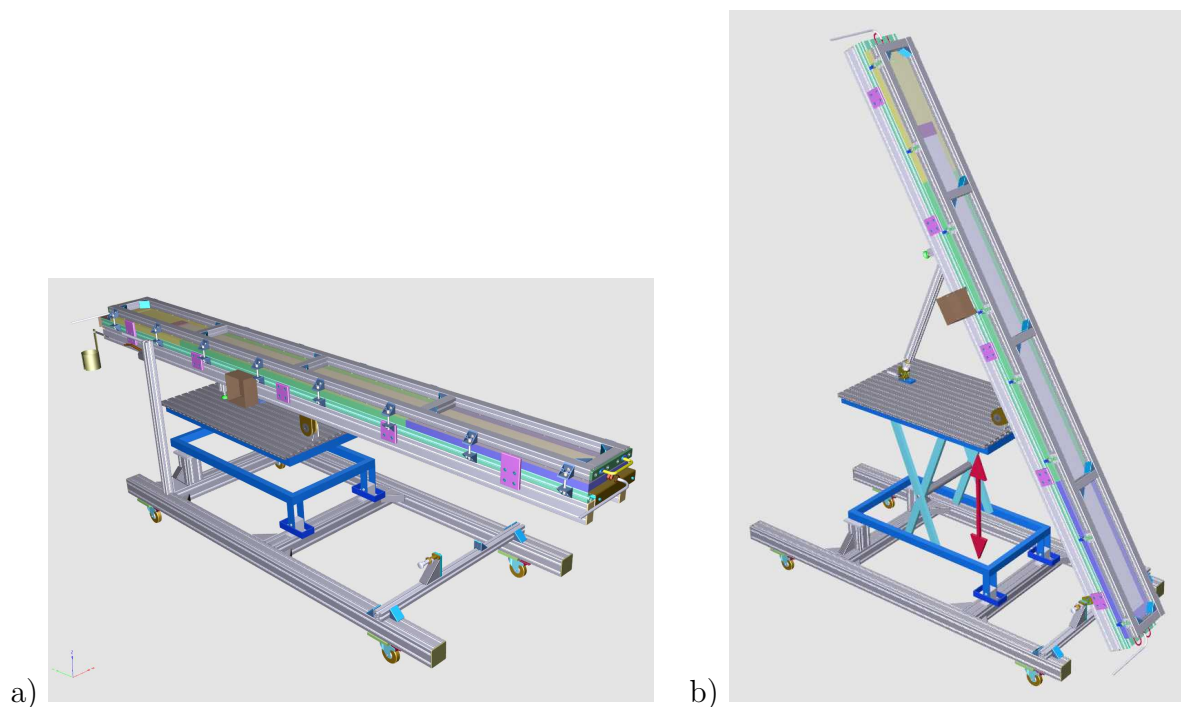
a) Casting jig in working position, b) Jig in casting position
